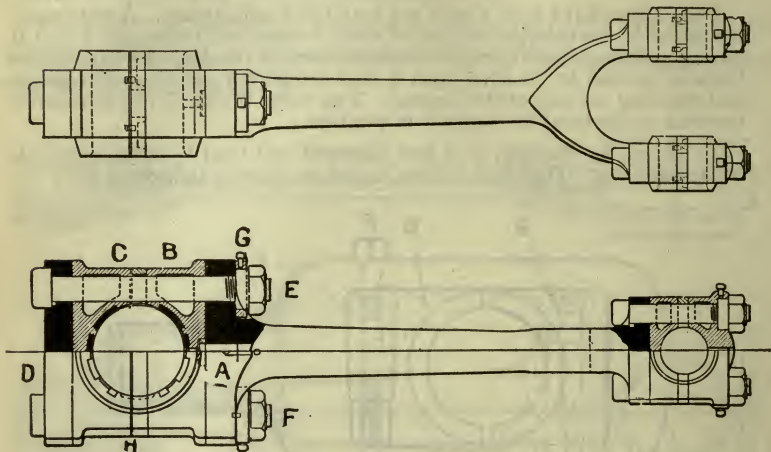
and 273.—Solid end with block adjustment; used extensively on Corliss connecting rods for both the wrist pin and crank pin. The parts are: A, B, brasses, A being provided with flanges C, D; E, adjusting block or wedge; F, G, adjustment bolts which retain the block in the desired position.
